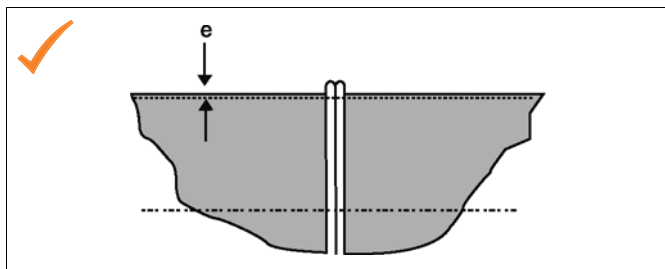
Butt-weld with even welding beads (acceptable)
